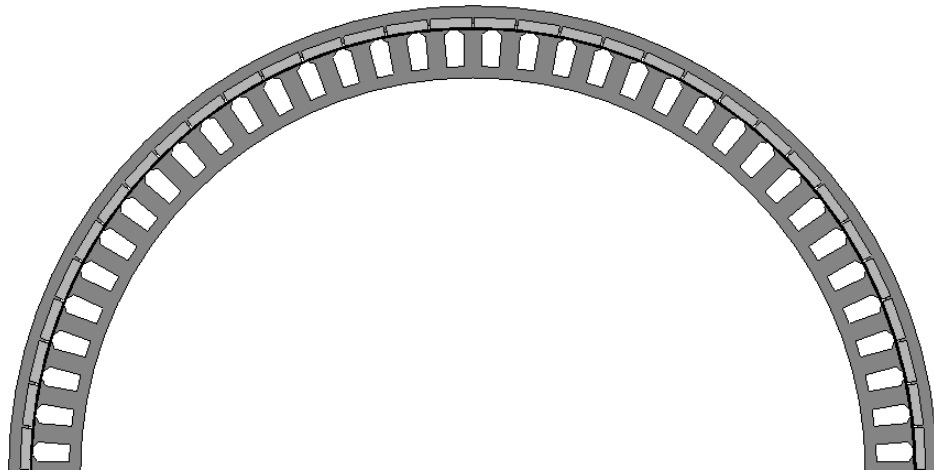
Ring type structure of outer rotor permanent magnet machine.
